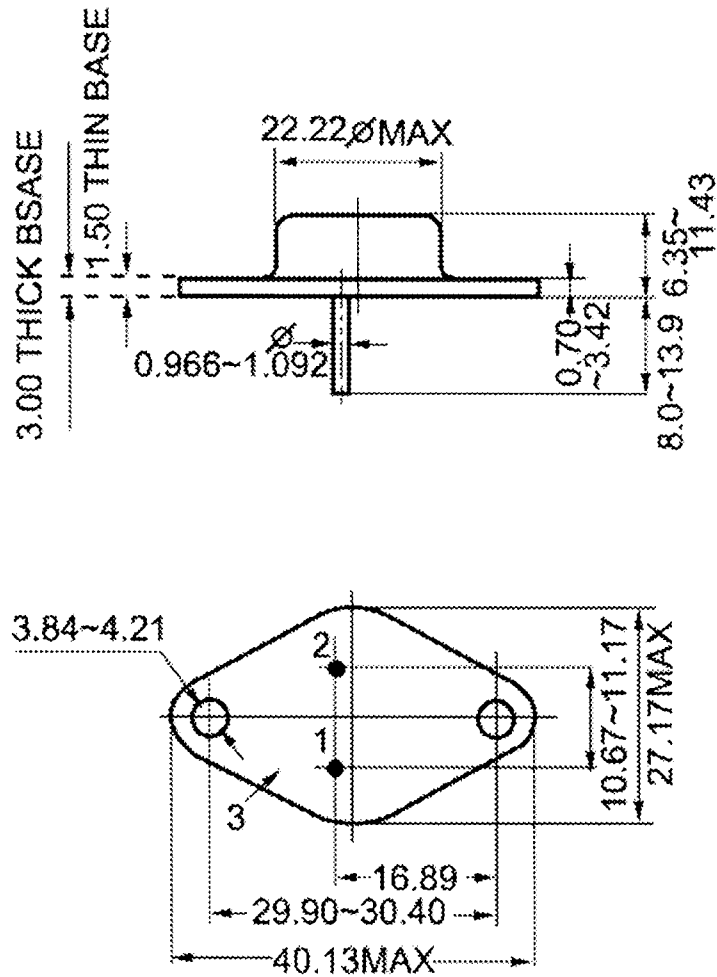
outline dimensions (unindicated tolerance:  $\pm 0.1\text{mm}$ )
